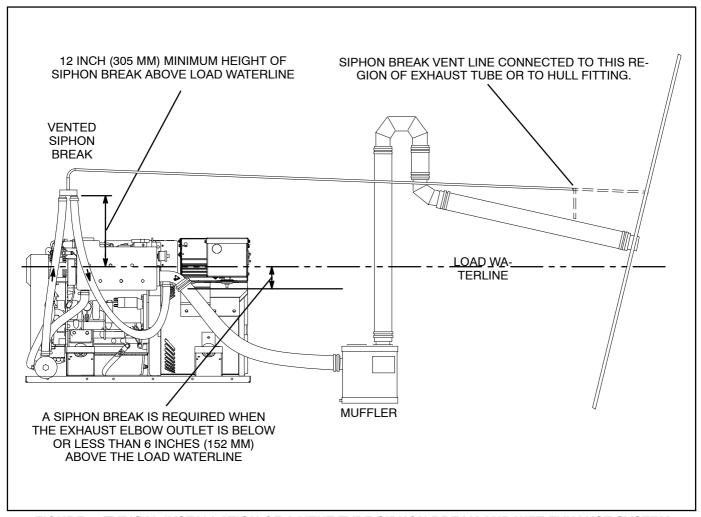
TYPICAL INSTALLATION OF A VENT-TYPE SIPHON BREAK AND WET EXHAUST SYSTEM
